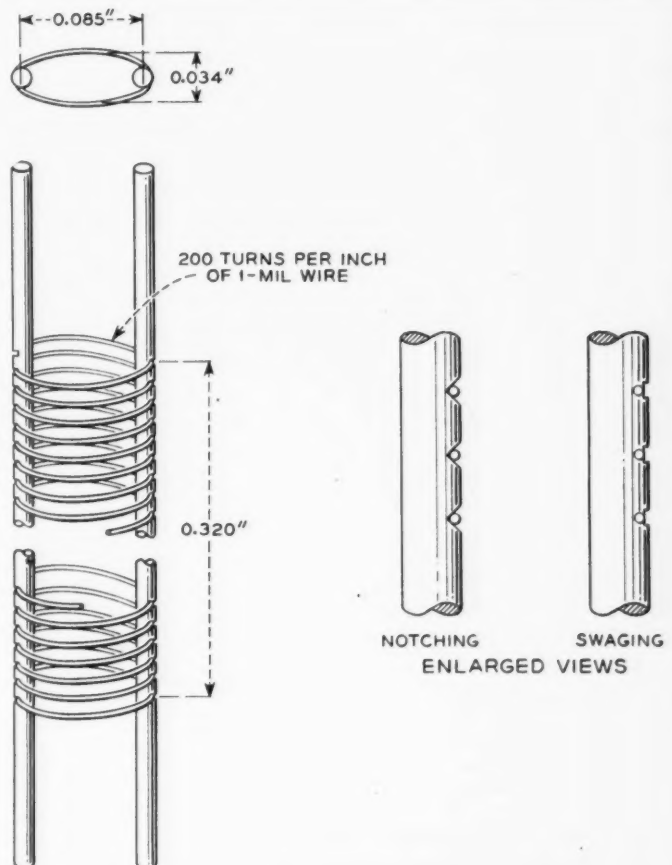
Grid construction used with the 6AK5 tube. The wires are held in place by notches in the nickel side rods.
